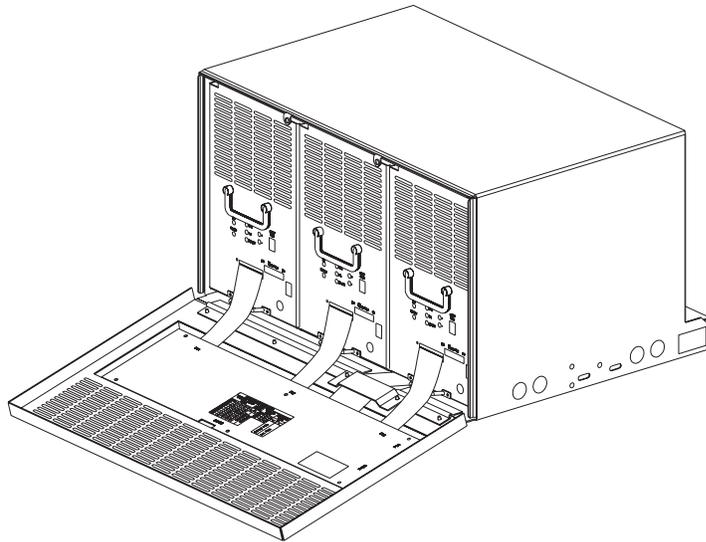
Power modules installed in Rectifier Housing Assembly (RHA)
